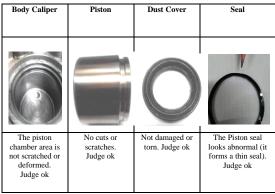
Investigation of piston seal and dust cover brake caliper front (Source: PT IUO Tbk)
